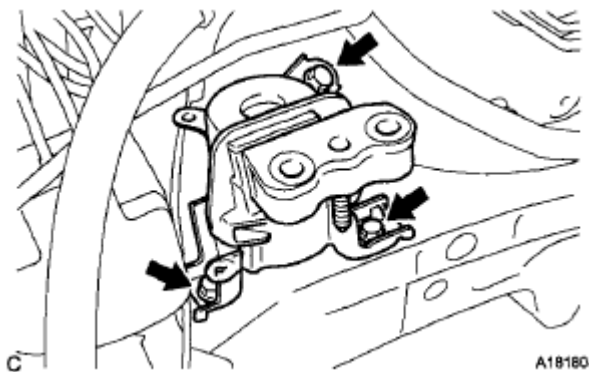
Locating Engine Mounting Insulator RH With Bolts
